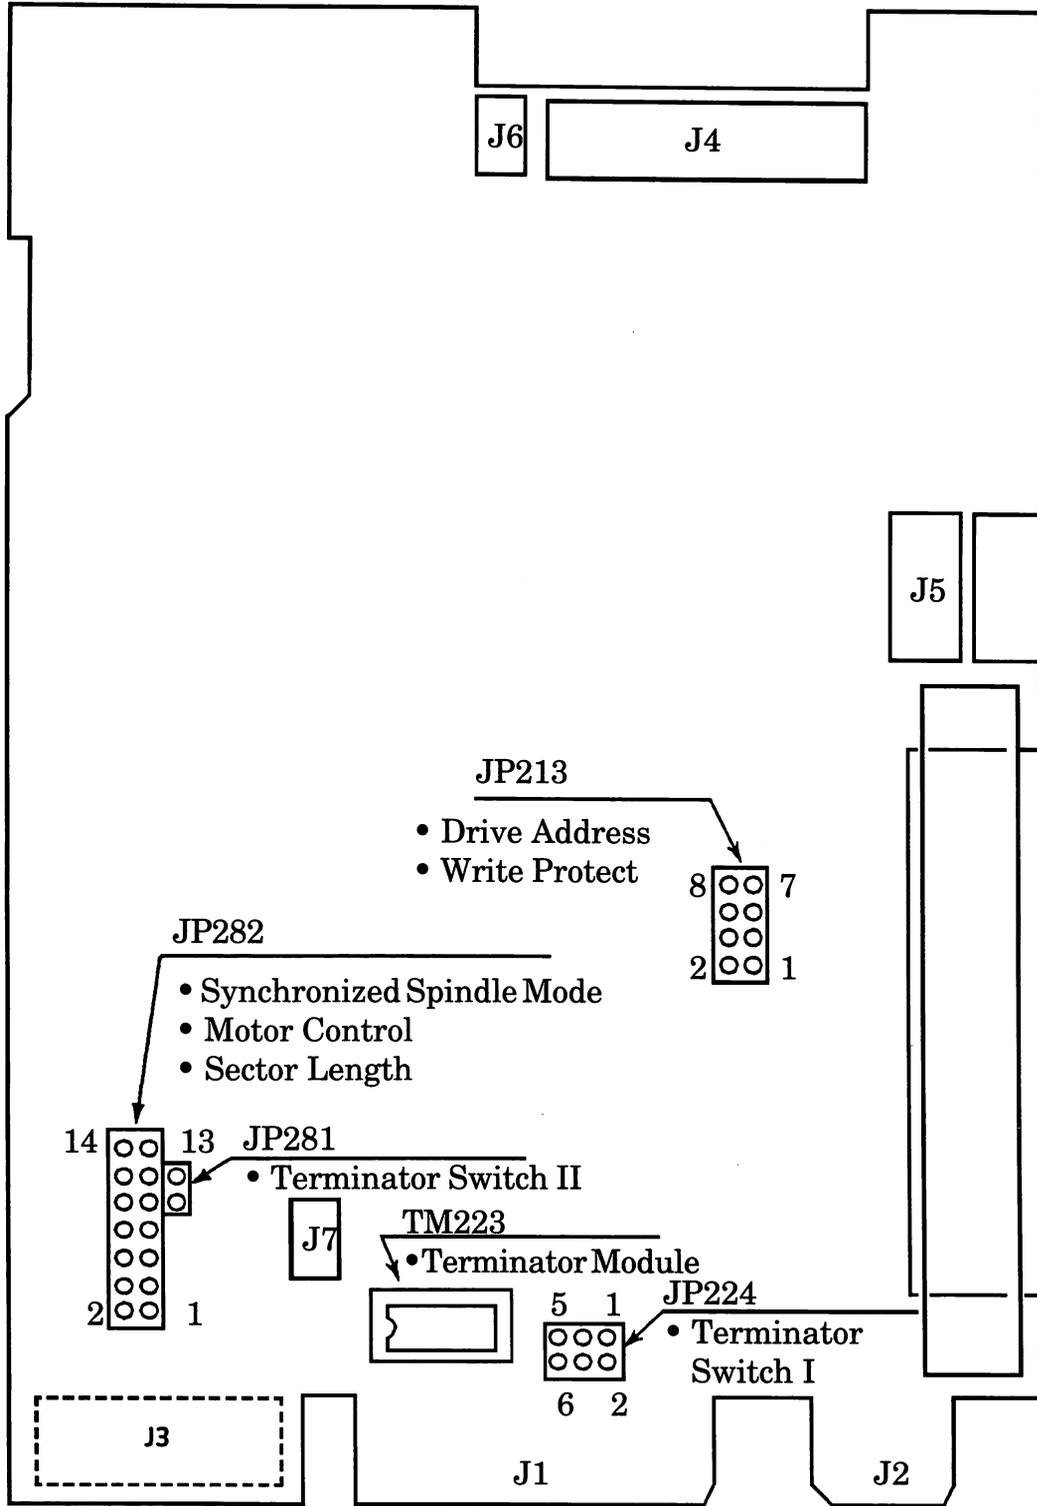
SZ931 PCB Layout (PCB Rev. 0)
